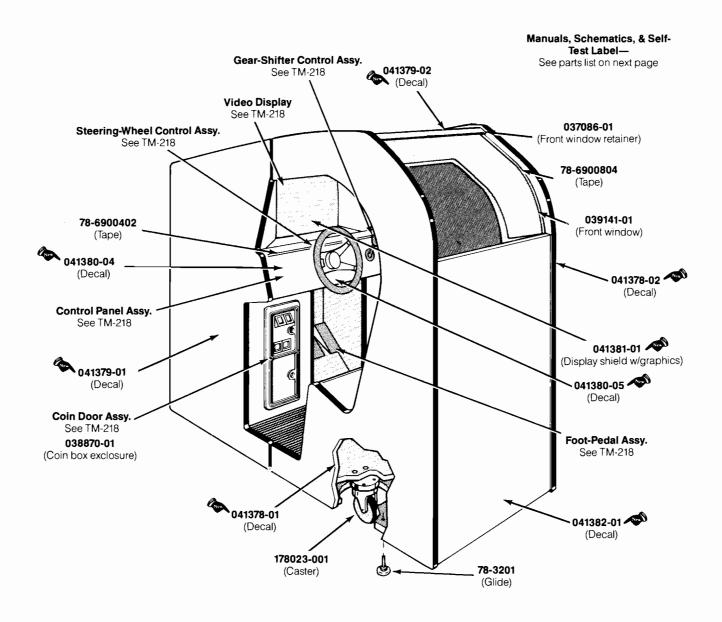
Cabinet-Mounted Assemblies, continued Pole Position II Sit-Down Cabinet A039100-01 R
